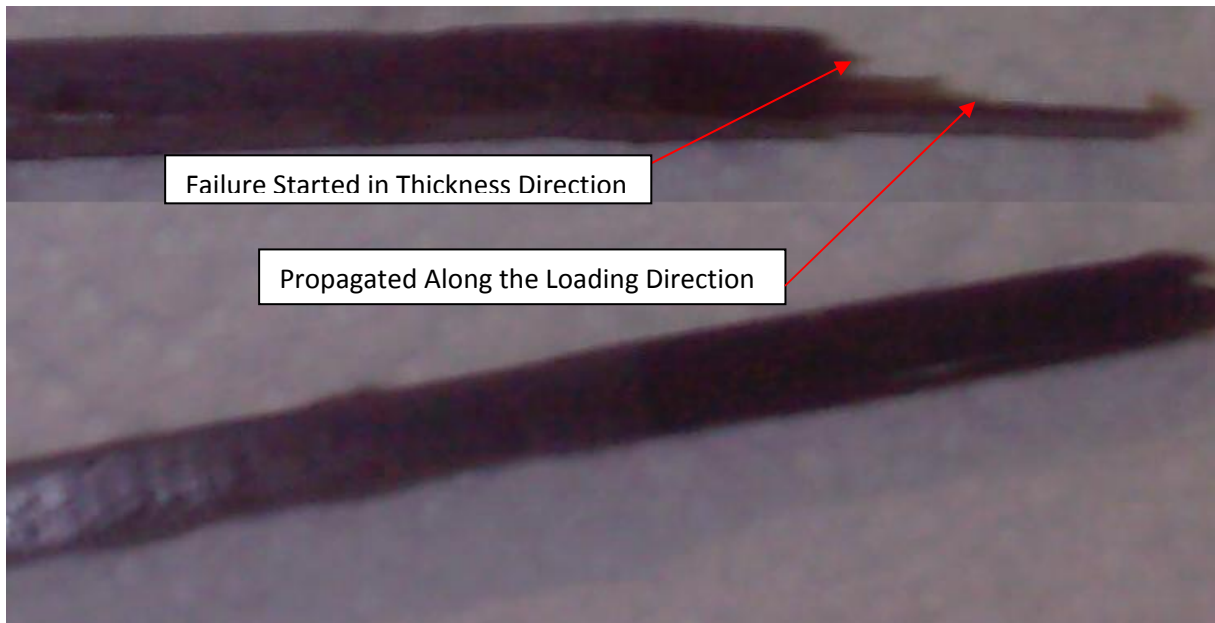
Failure Mechanism of Machine Direction Specimens – Oil Impregnated
